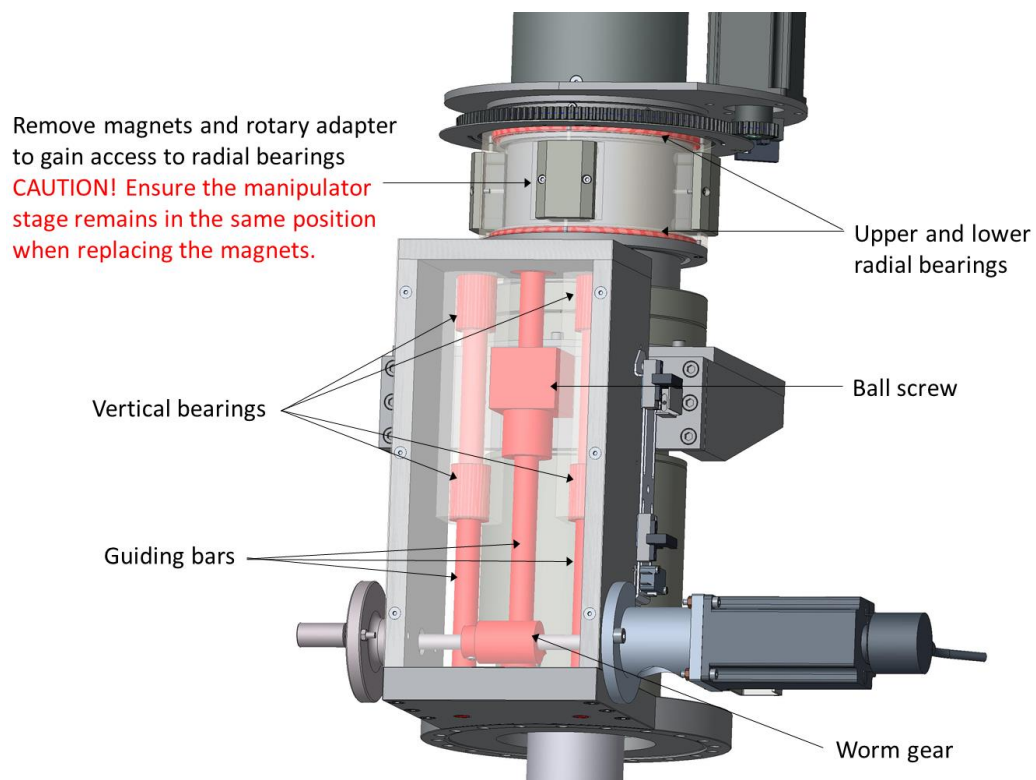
Schematic showing the manipulator parts that require lubrication after bakeout.
